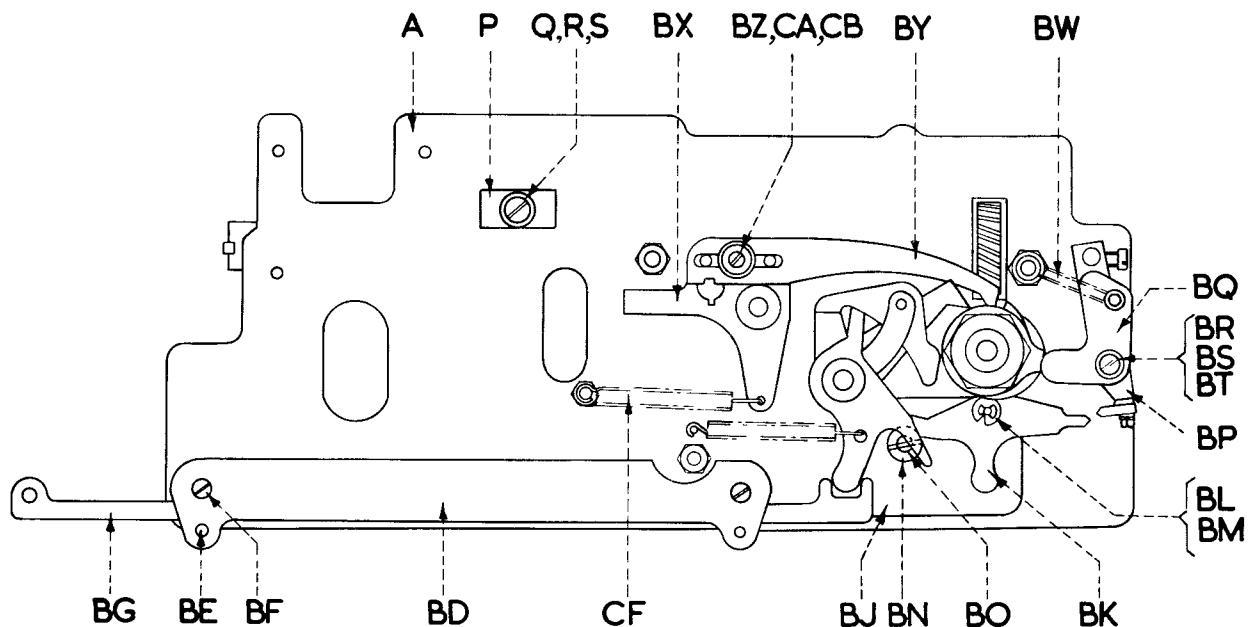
PERFORATOR OPERATING UNIT (PARTIAL ASSEMBLY)
